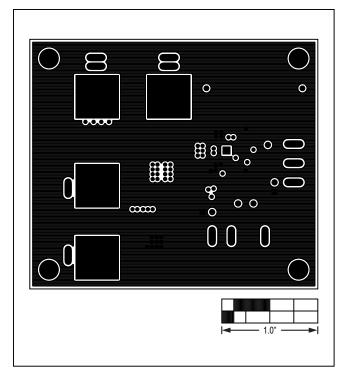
MAX16962R EV Kit PCB Layout—SGND Layer 3
